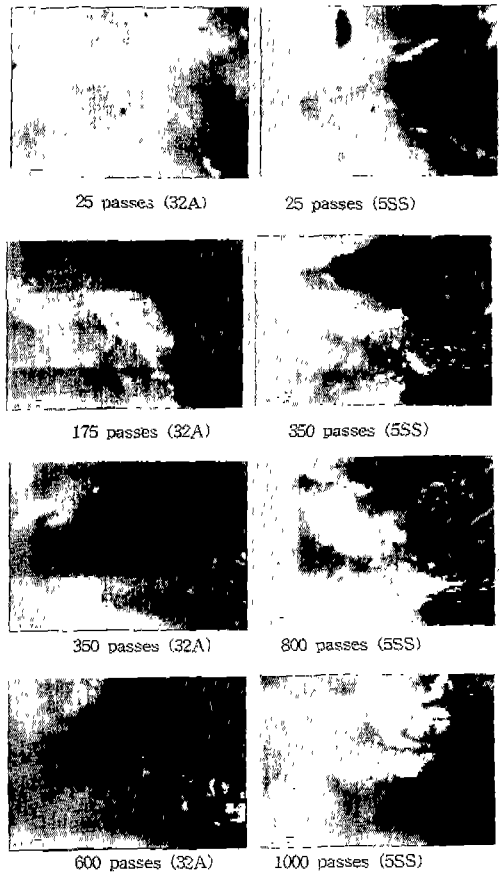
Photographs of abrasives showing the progress of wear (dry grinding)
